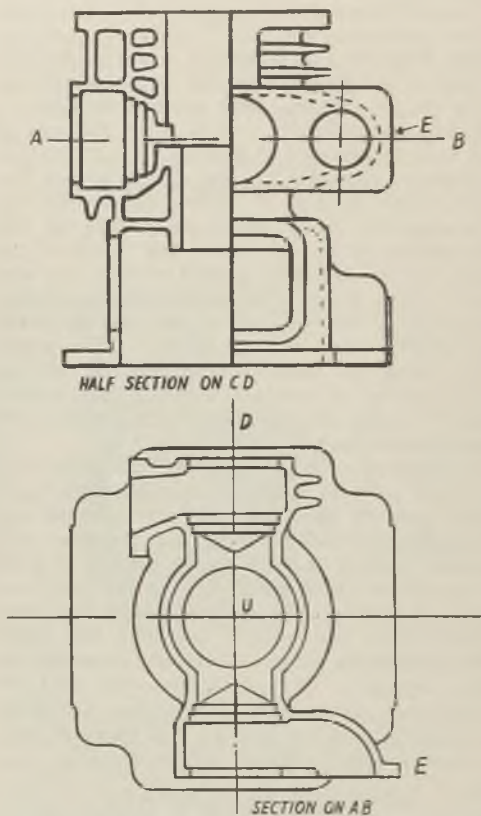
CYLINDER FOR AIR-COOLED AIR COMPRESSOR.
